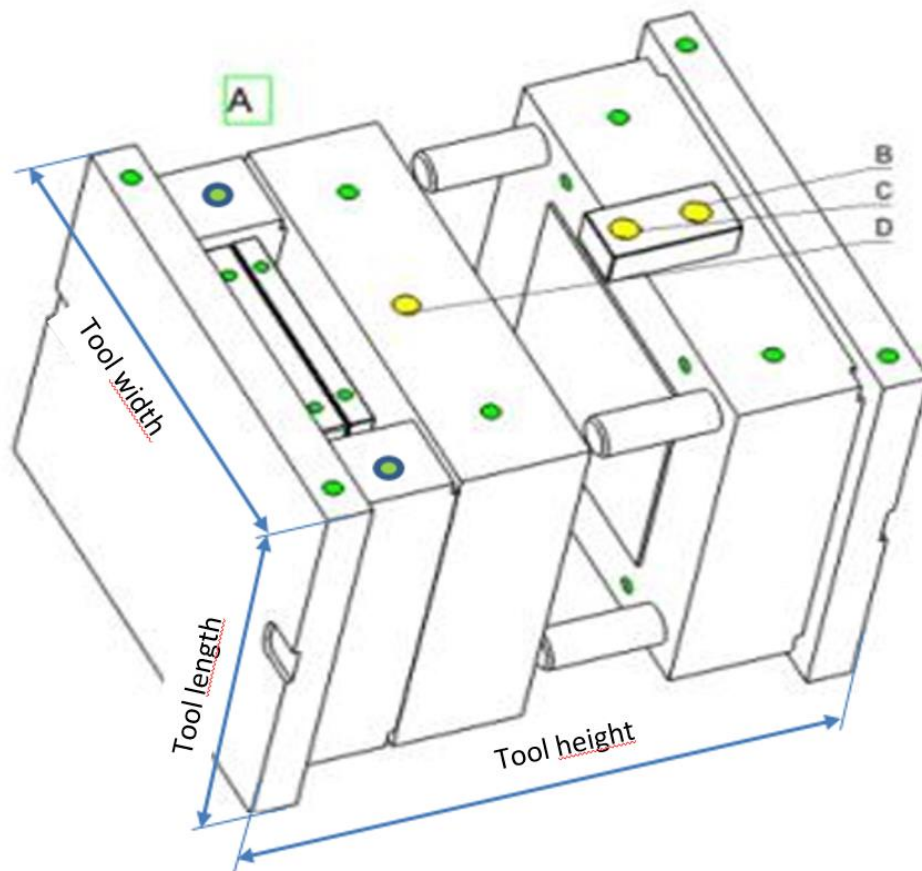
Mounting thread (A), transport thread for entire mold (C), transport thread for mold halves (B + D)
